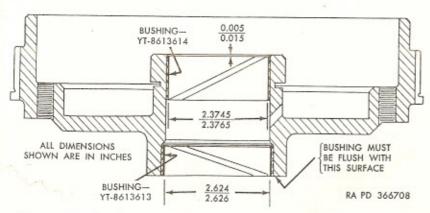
Sectional view of reduction clutch drum assembly (303M).
